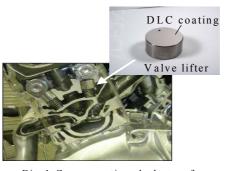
Cross-sectional photo of engine cylinder head DLC coating
